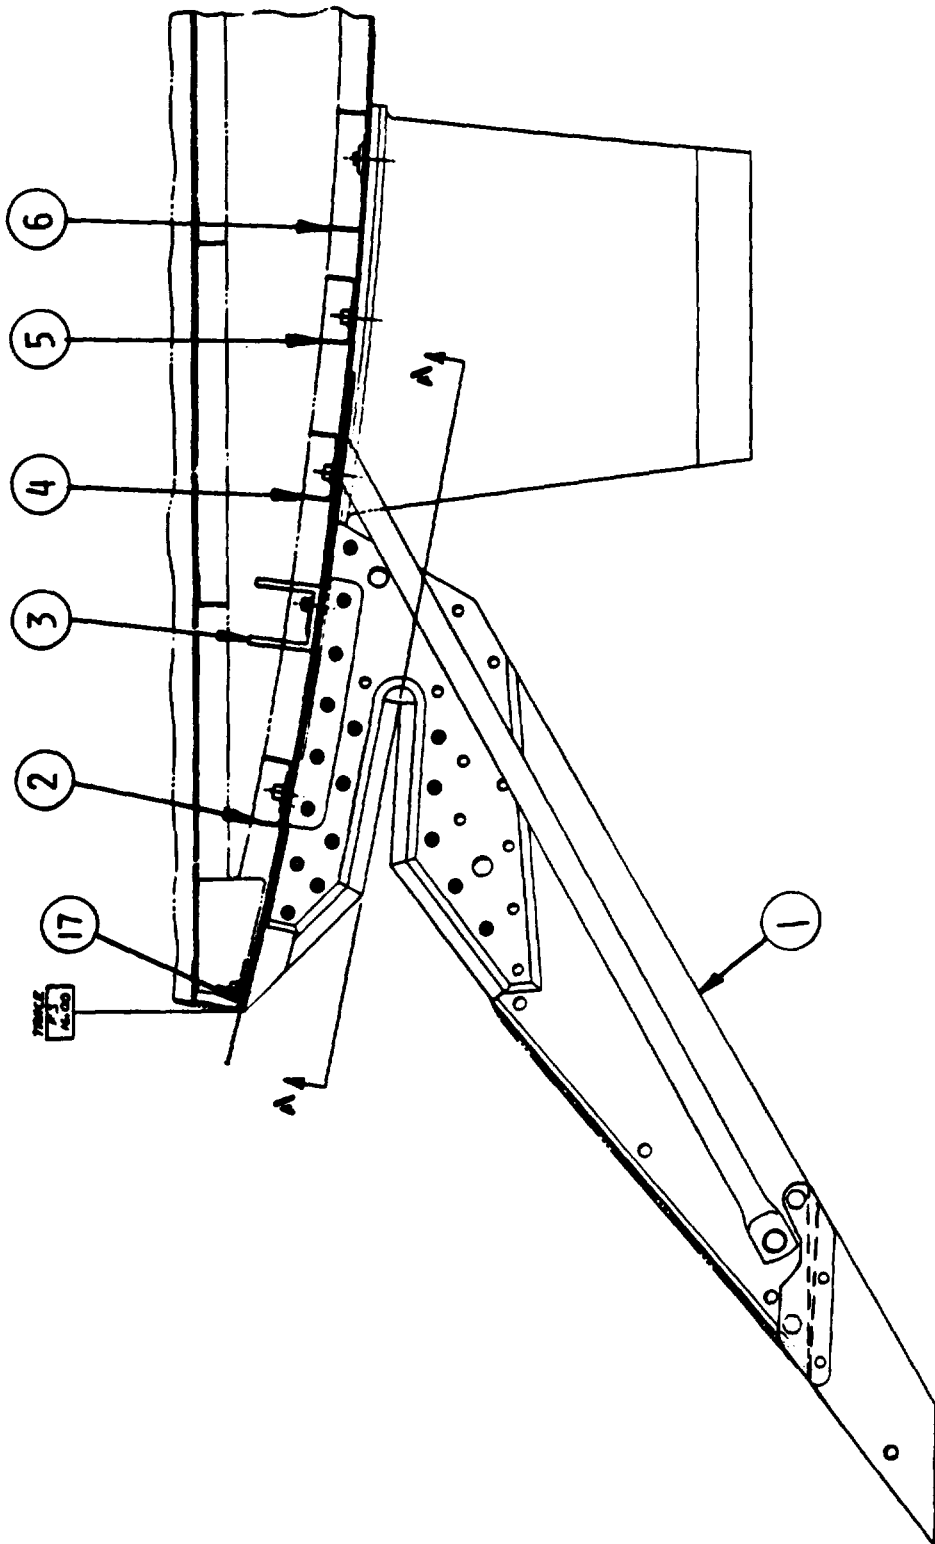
LOWER CUTTER INSTL. - SHEET 1 OF 3
